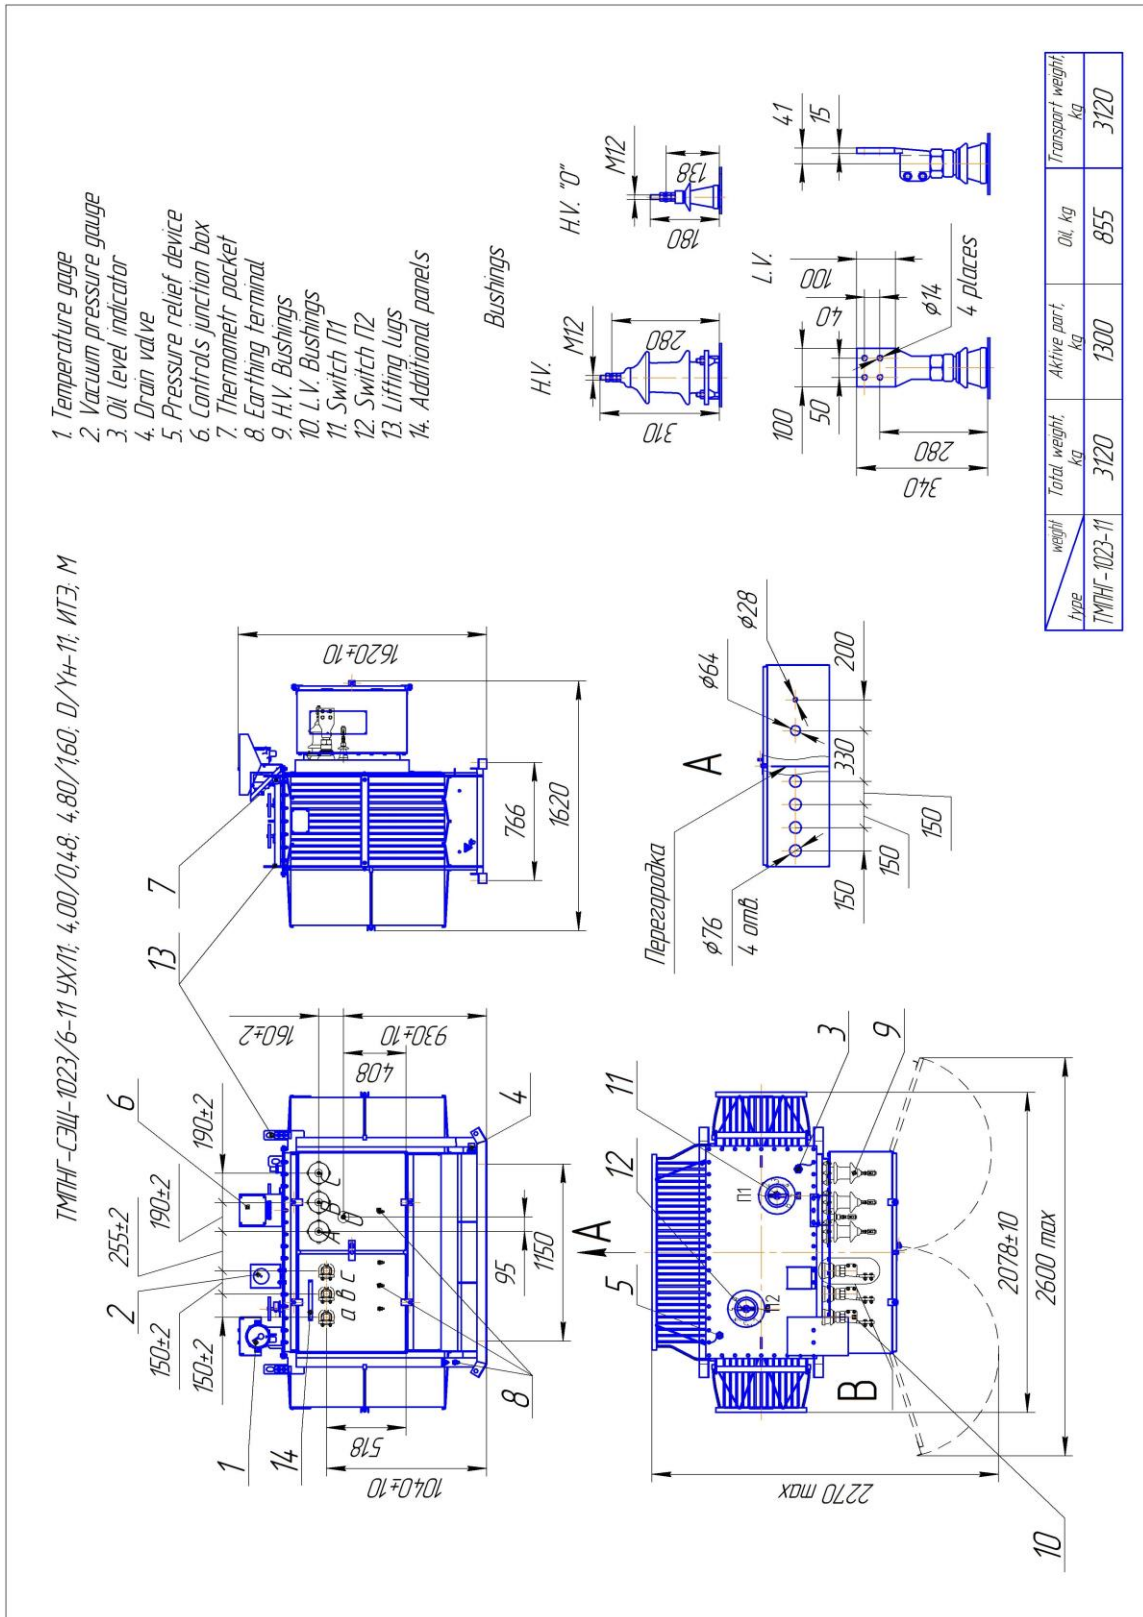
Overall, installation and connection dimensions of transformers TMPNG -1023/6-11 UHL1; 4,00/0,48; 4,80/1,60 УН/D-11
